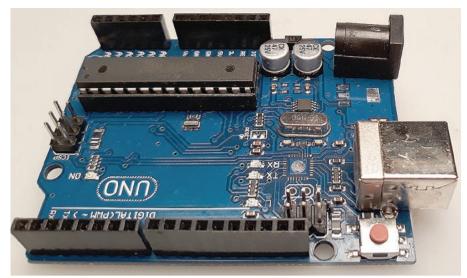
one of our boards after removing the defective parts and cleaning the pads. We've also removed the residual flux; the result is almost like a brandnew board.
